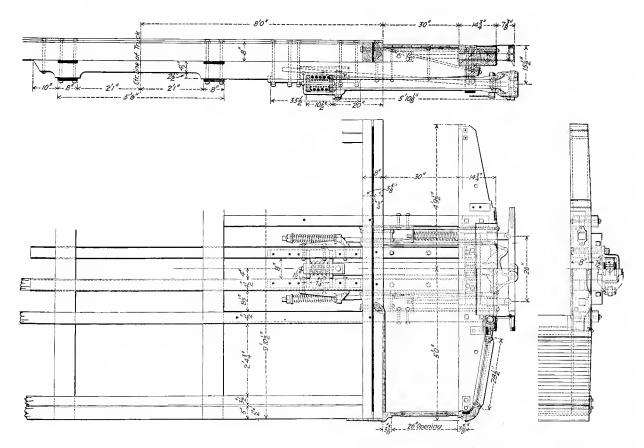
Platform and Three-Stem Draft Gear for Cleveland, Cincinnati, Chicago & St. Louis Passenger Train Cars.
